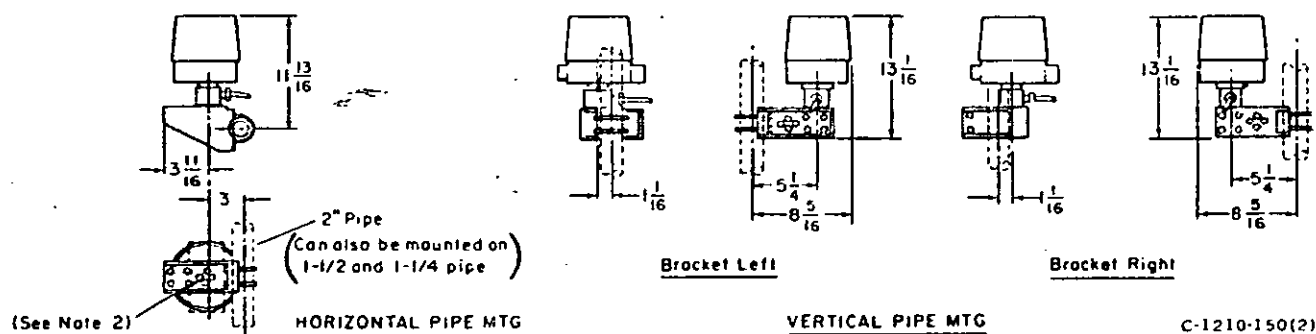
Mounting Dimensions for 3446T and 3447T Transmitters with Bolted Cover
